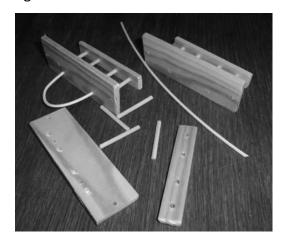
, shows an assembled seat and the components that are required to make the seat. Once the seat is assembled it can be installed into the Coracle frame.
